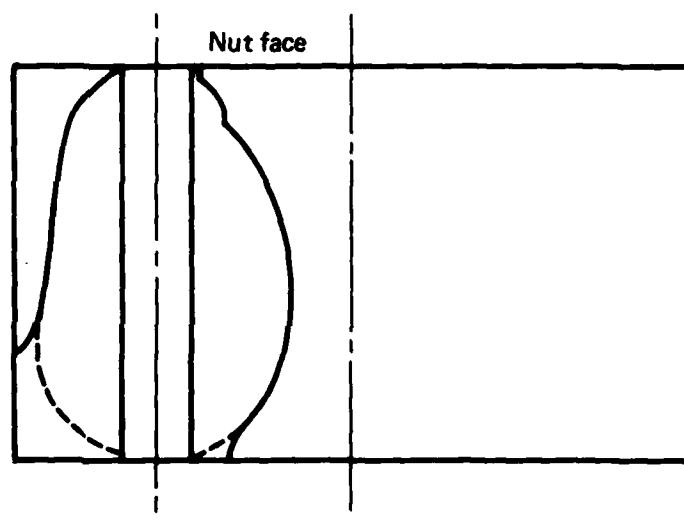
(b) FRACTURE SURFACES: SPECIMEN TYPE (B)
